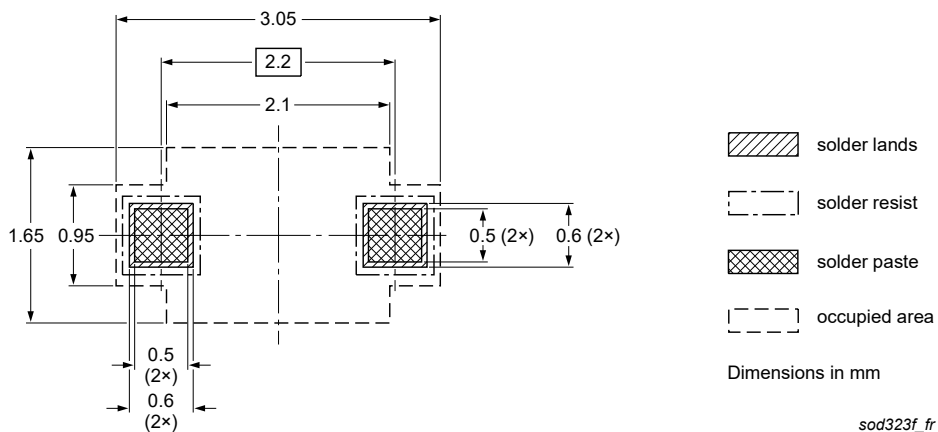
Reflow soldering footprint for SC-90 (SOD323F)
